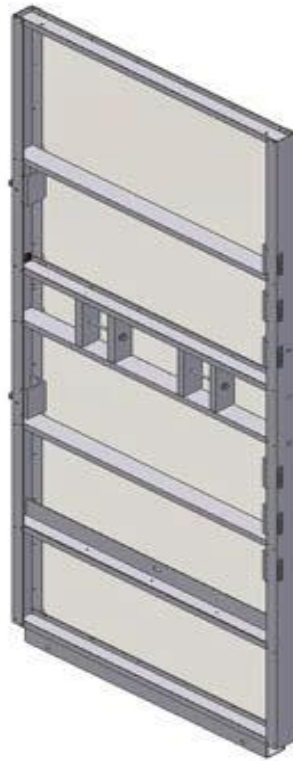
Rendering of base assembly with strut component upright, platform locked [ref 9]
